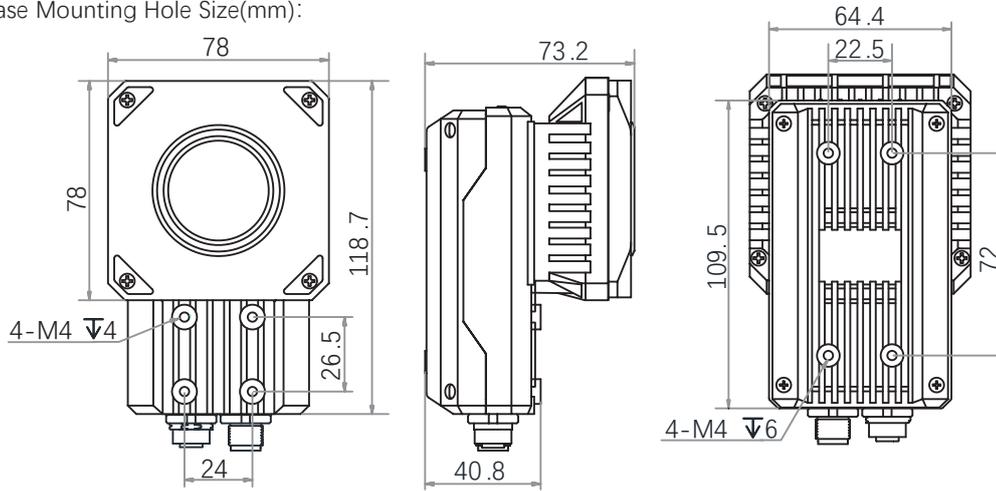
Mechanical Dimensions (in mm) of the code reader with 78 \* 118.7 \* 73.2 mm housing (Built-in 4 LED lamps and a mechanical focus lens.).
